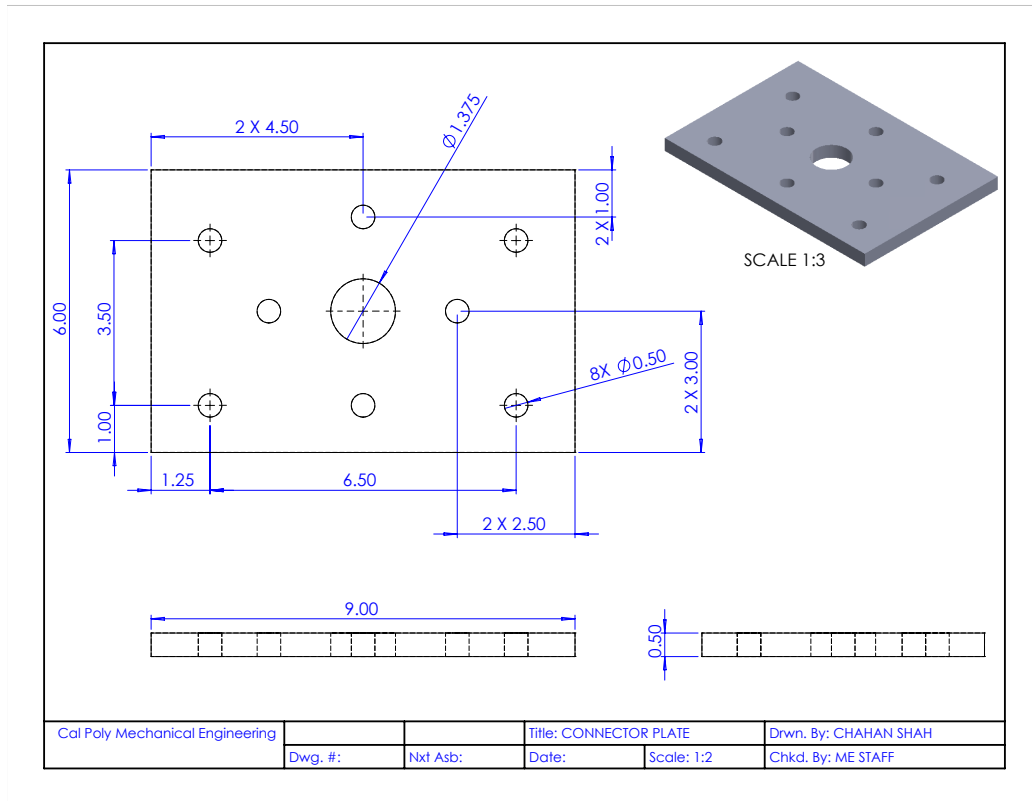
Drawing of connector plate for the winch and motor enclosure.
